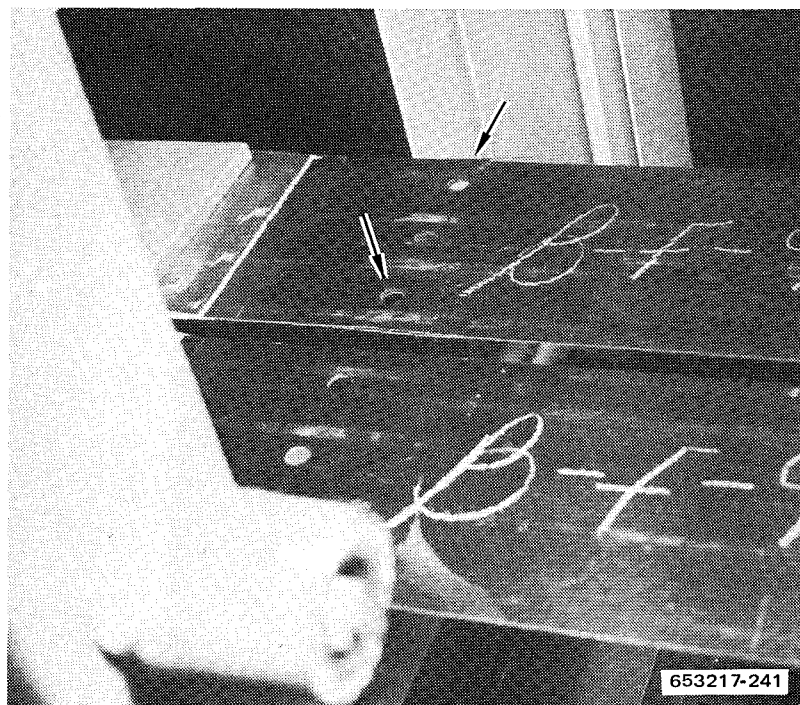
G/E Long-Term Specimen BF91-4 Showing Cracks and Delaminations (arrows) at Edges and Holes
